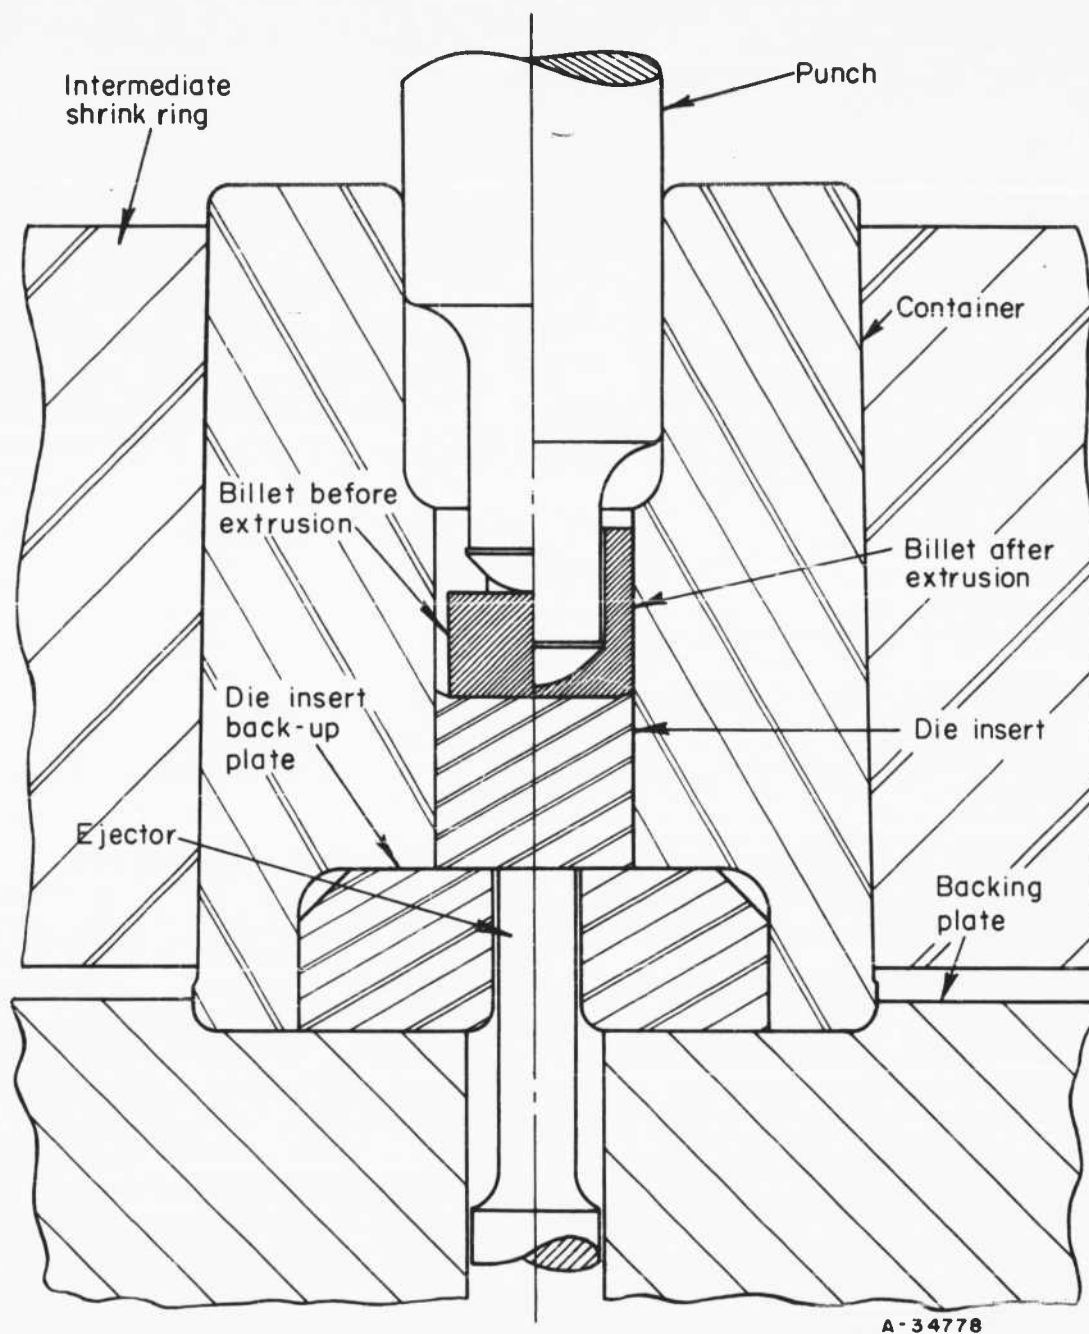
TOOLING ARRANGEMENT USED IN BACKWARD EXTRUSION OF HEXAGONAL CUPS
